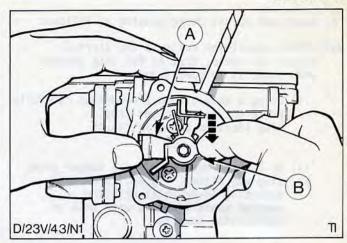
Choke held at pull down/fast idle setting. A - Bi-metal lever held fully clockwise B - Vacuum piston pushed downwards to the bottom of its travel
